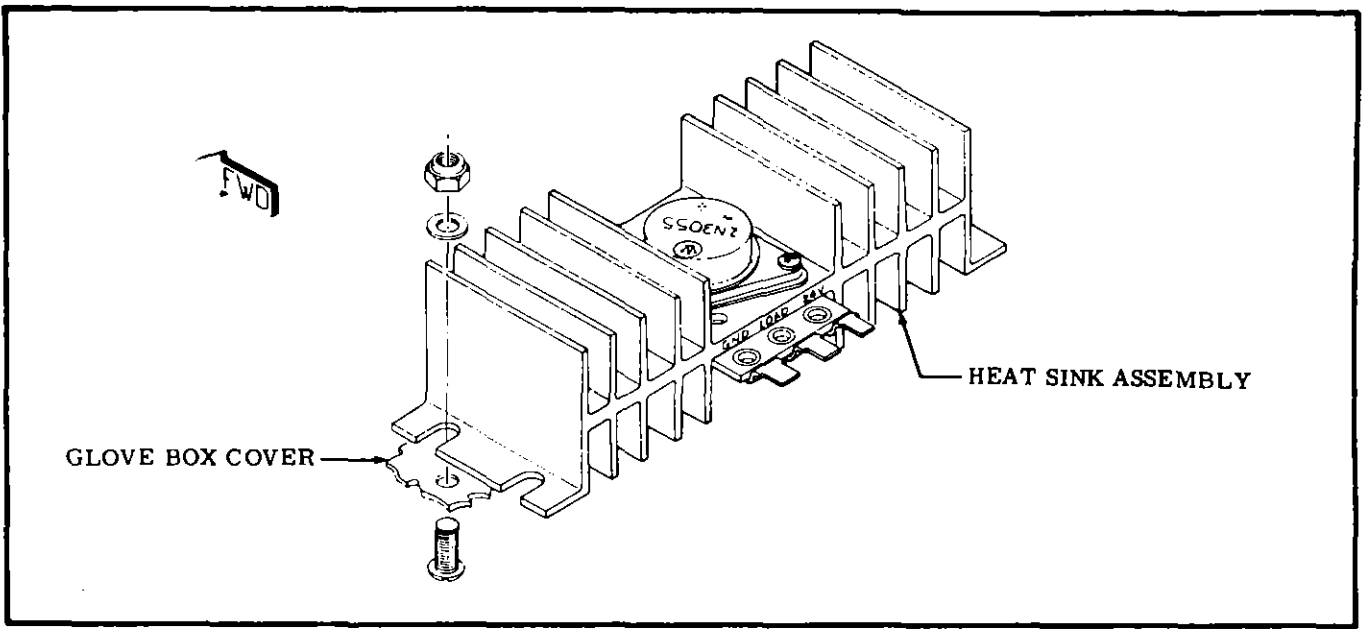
Heat Sink Assembly (Voltage Regulator) Installation
